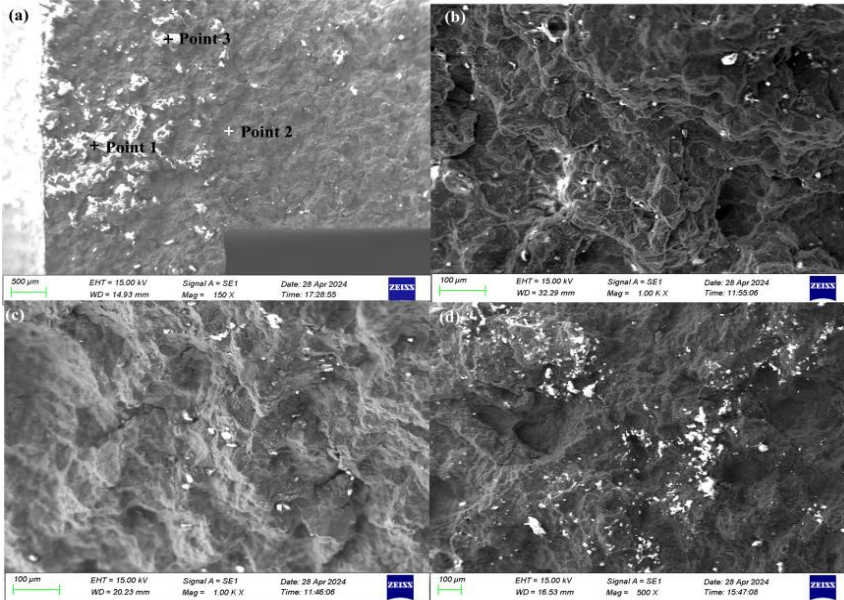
Macroscopic morphology of fracture surface of 1#-4#.
